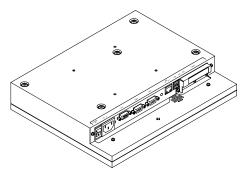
Attaching the PCMCIA card removal prevention fittings <2/2>
